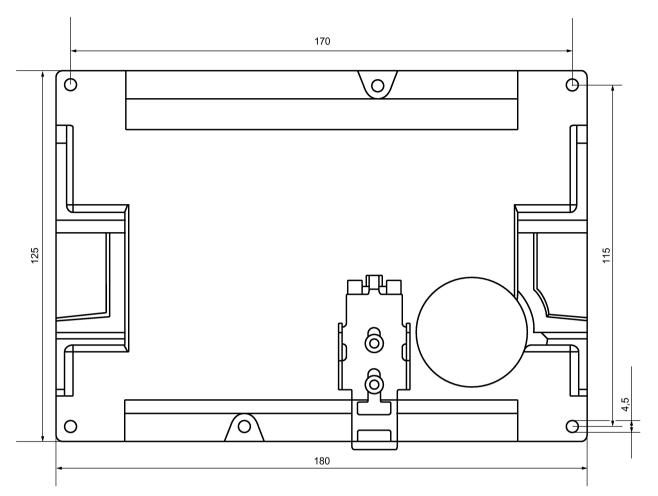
Dimension drawing, rear of the SCALANCE X124
